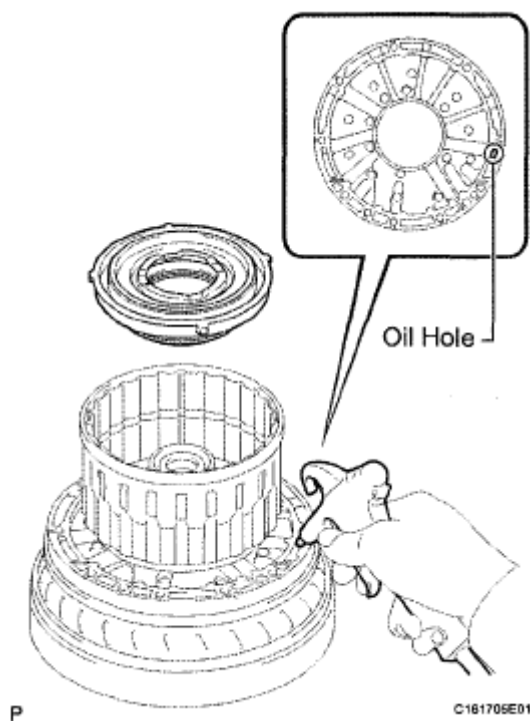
Applying Compressed Air To Oil Hole Of Oil Pump
